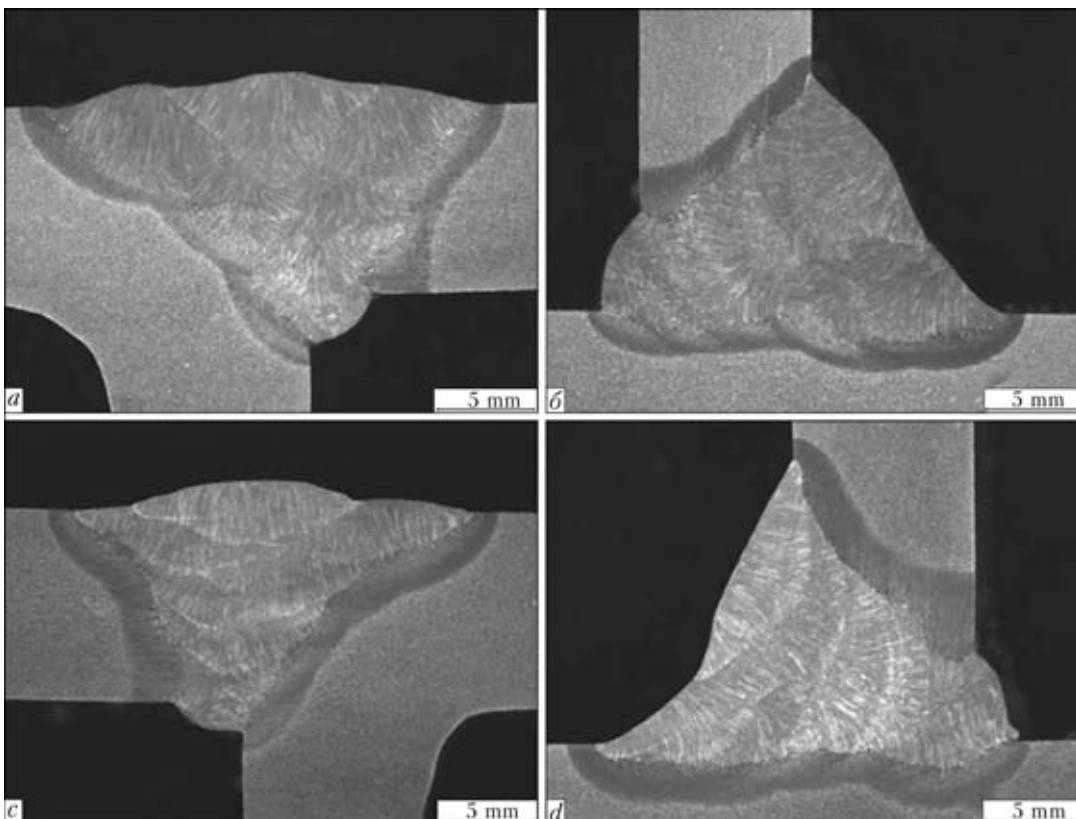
Macrosections of butt and fillet welds made by solid M1S, M1K (a, b) and flux-cored F1S, F1K (c, d) wires
